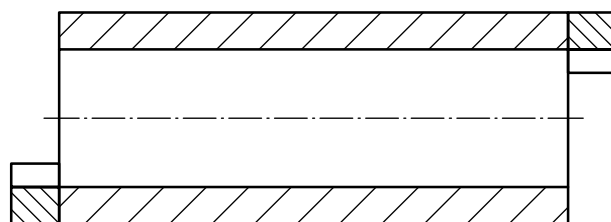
Example of mounting two on welded heat buffers on a sample product
